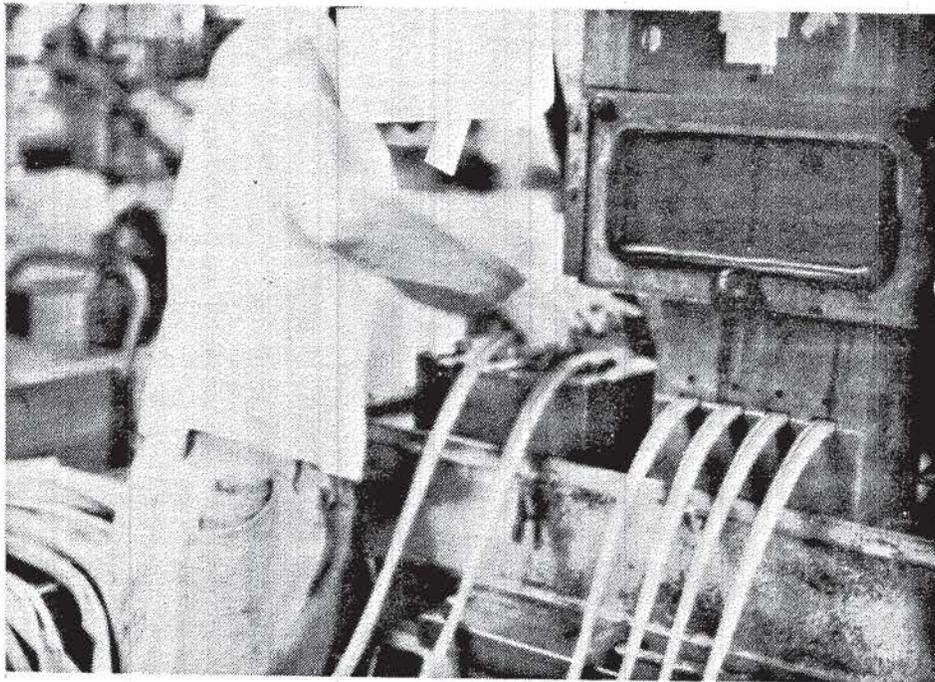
Inserting blades into the plug housing fixture on the Moslo Molder.
